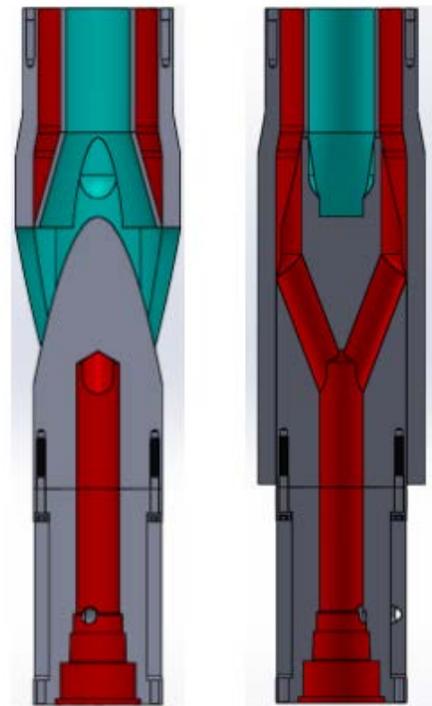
CAD MODEL OF CROSSOVER ASSEMBLY
